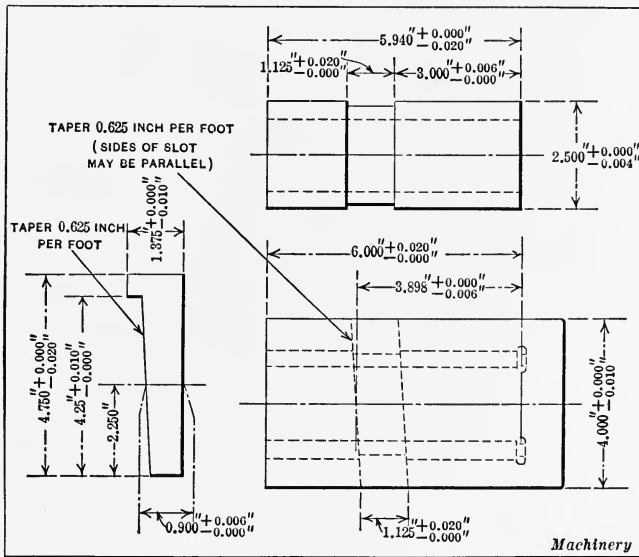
Correct Dimensioning and Design of Details shown in Fig. 19
